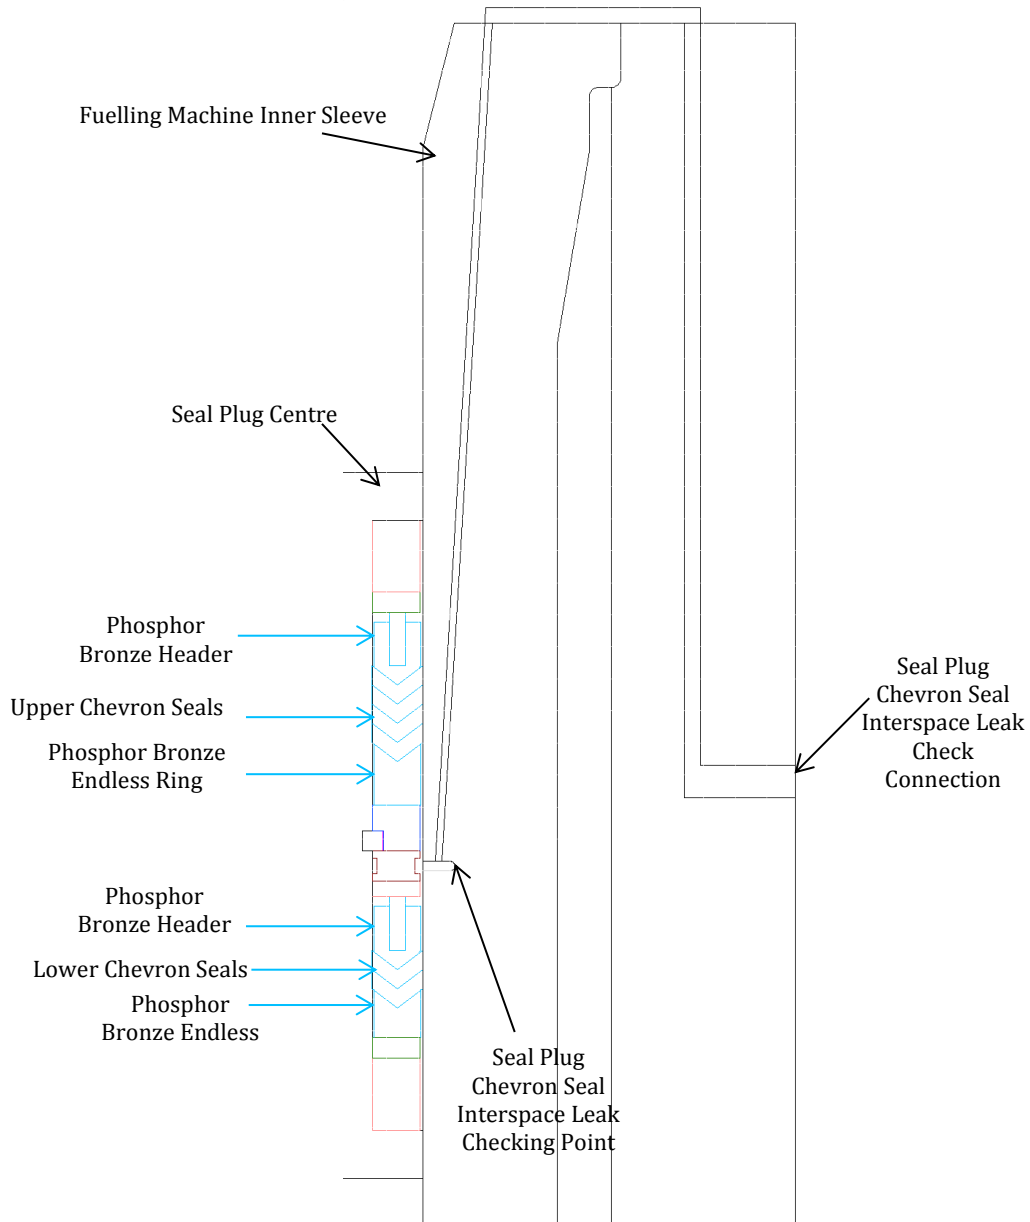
In-Service Geometry of the Full Seal Plug Chevron Seal Assembly
